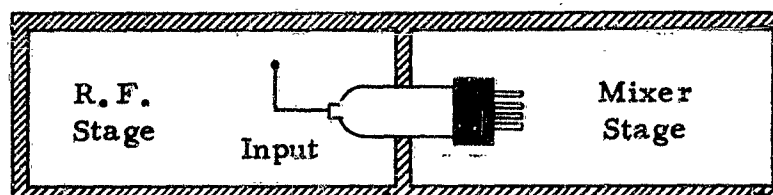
Mounting of Vacuum Tube Through Internal Shield
